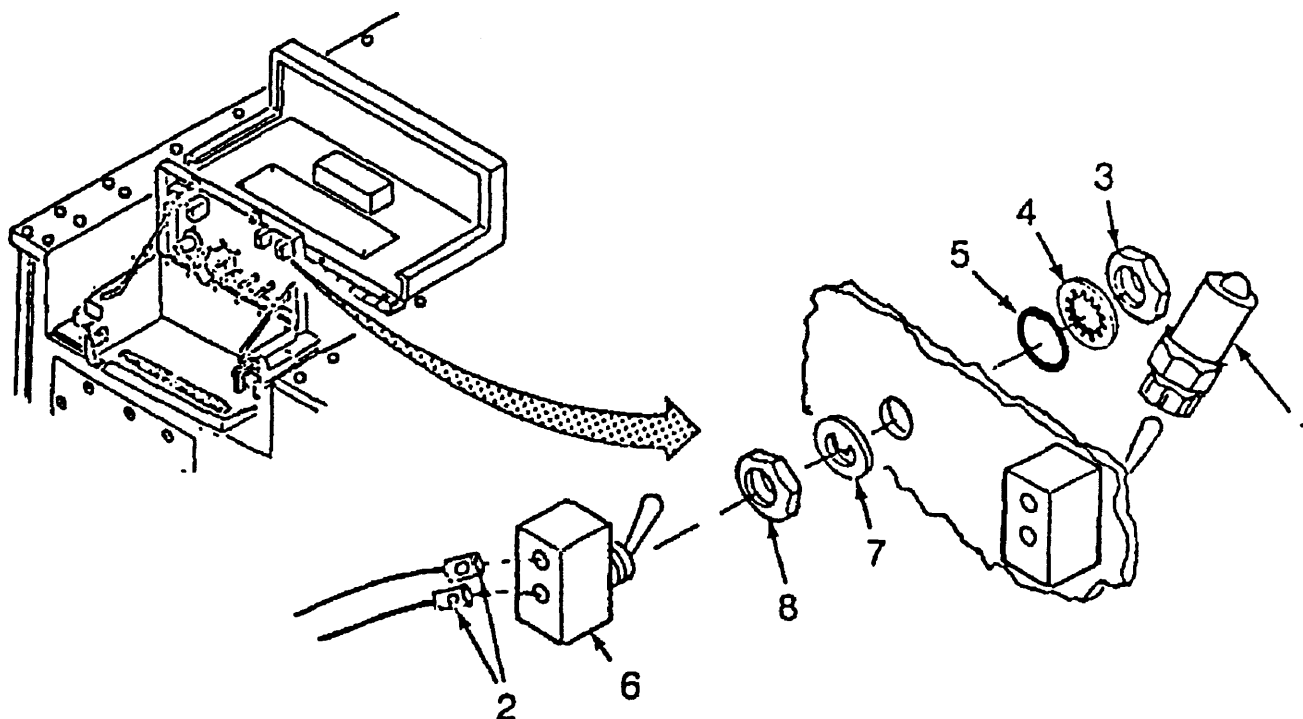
Control Box Disassembly Purge and Flame Reset Switches
